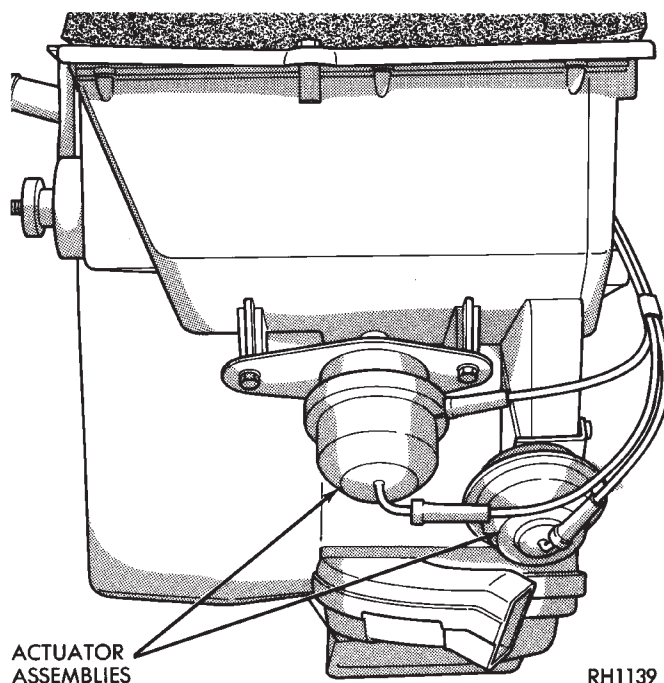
Removing or Installing Heat/Defrost Vacuum Actuator Assembly
